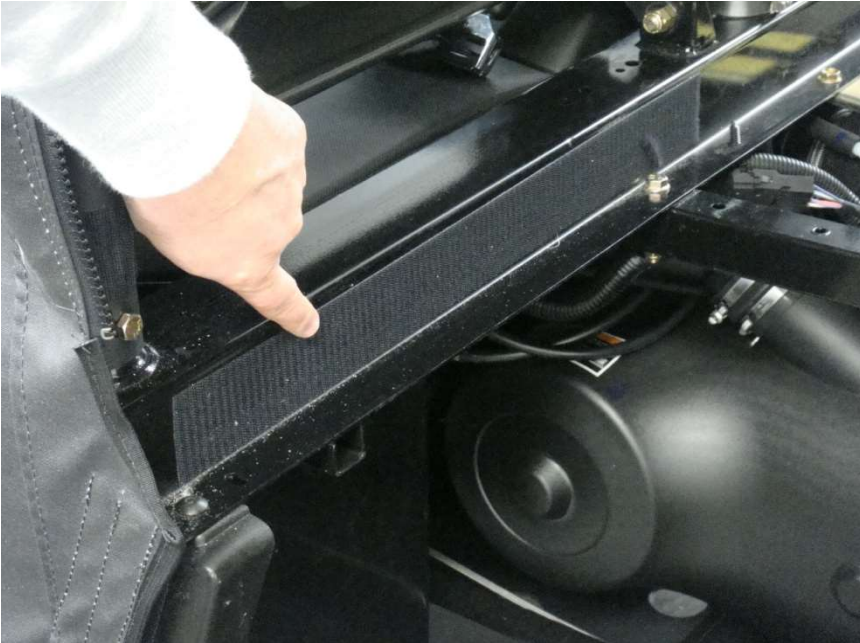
attach 21" Velcro strips to Rear Cab Frame facing toward the rear of the vehicle
